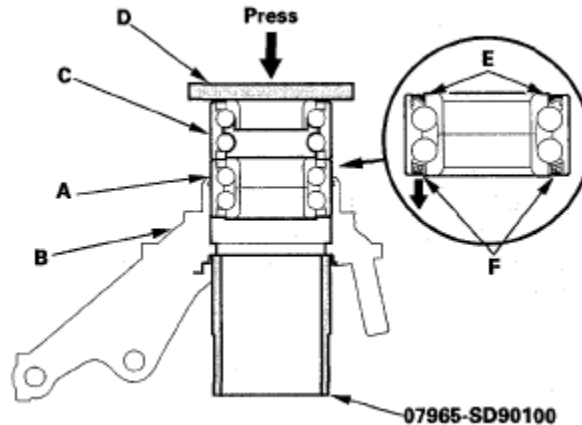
Pressing Wheel Bearing Into Knuckle Using Old Bearing, Steel Plate And Support Base
